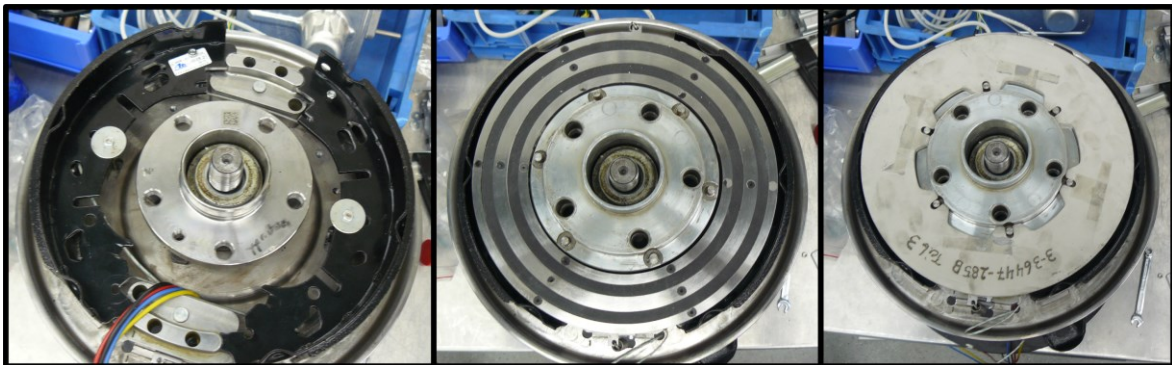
Hybrid drum brake in different stages of assembly (left: drum brake shoes, middle: friction surface of magnet, right: fully assembled except drum)
